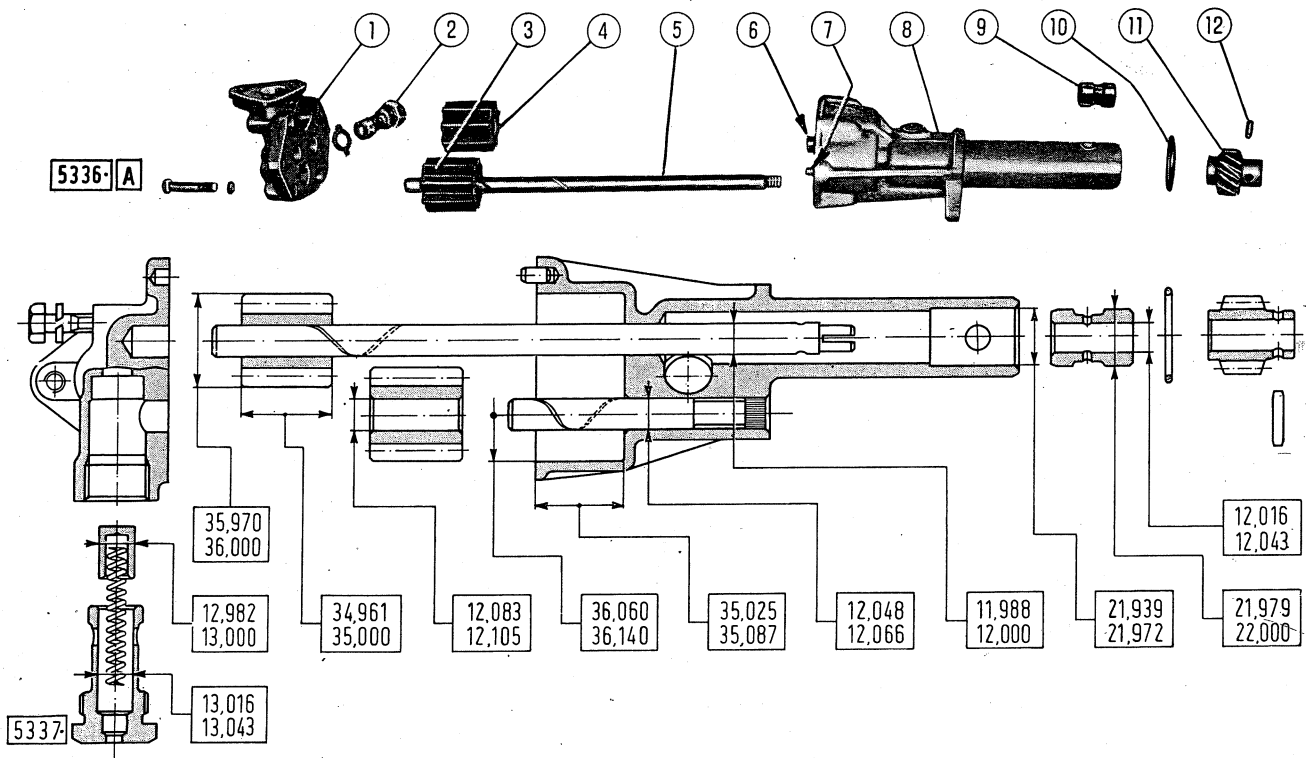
Oil pump parts and assembly data (mm - See conversions in Section VIII).
